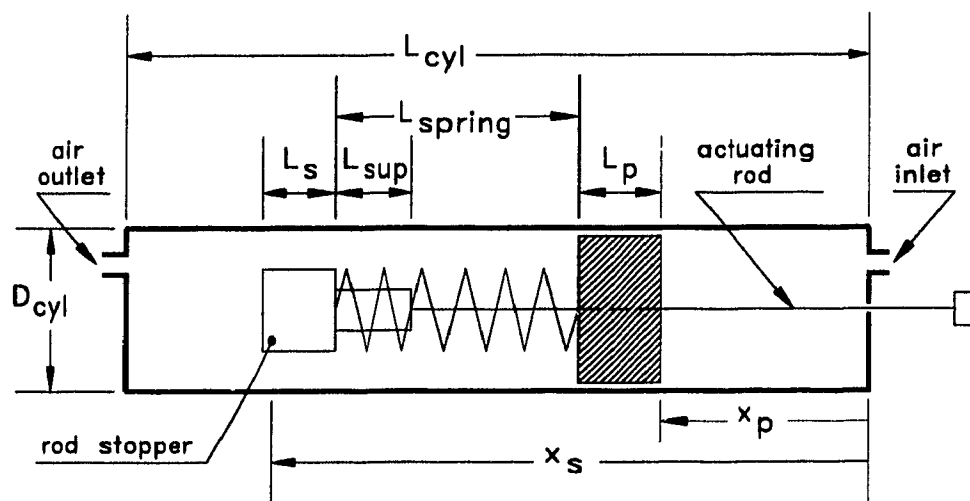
Schematic diagram of piston/cylinder assembly.
